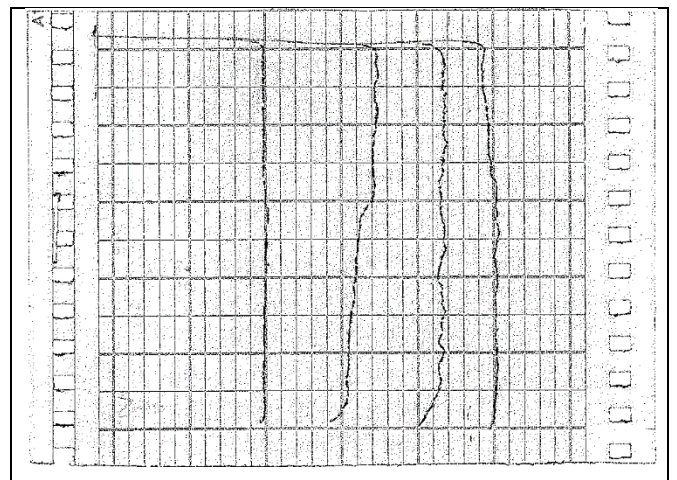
Gear lead of 4 teeth of Gear manufactured on gear WEDM
